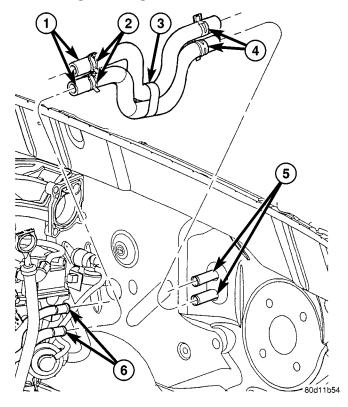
Heater Hose Assembly- LHD 2.0L (typical 2.4L)
